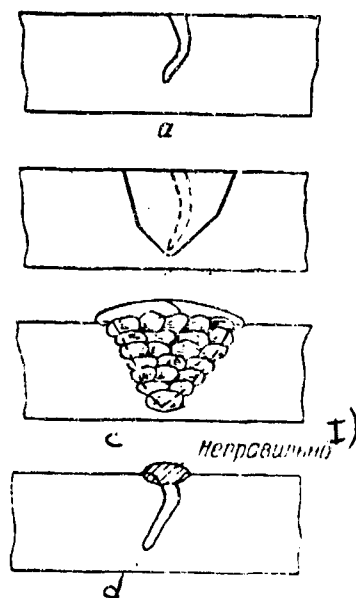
Steps Involved in Welding in the Defects (of Blind Cracks): a- defect; b- dressing; c- welding; and d- incorrect welding. Key: I) Incorrectly.
